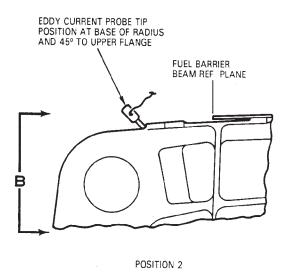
Center Fuselage Bulkhead Y470.500, Upper Flange Step Radii Inspection Area, and Typical Flaws
